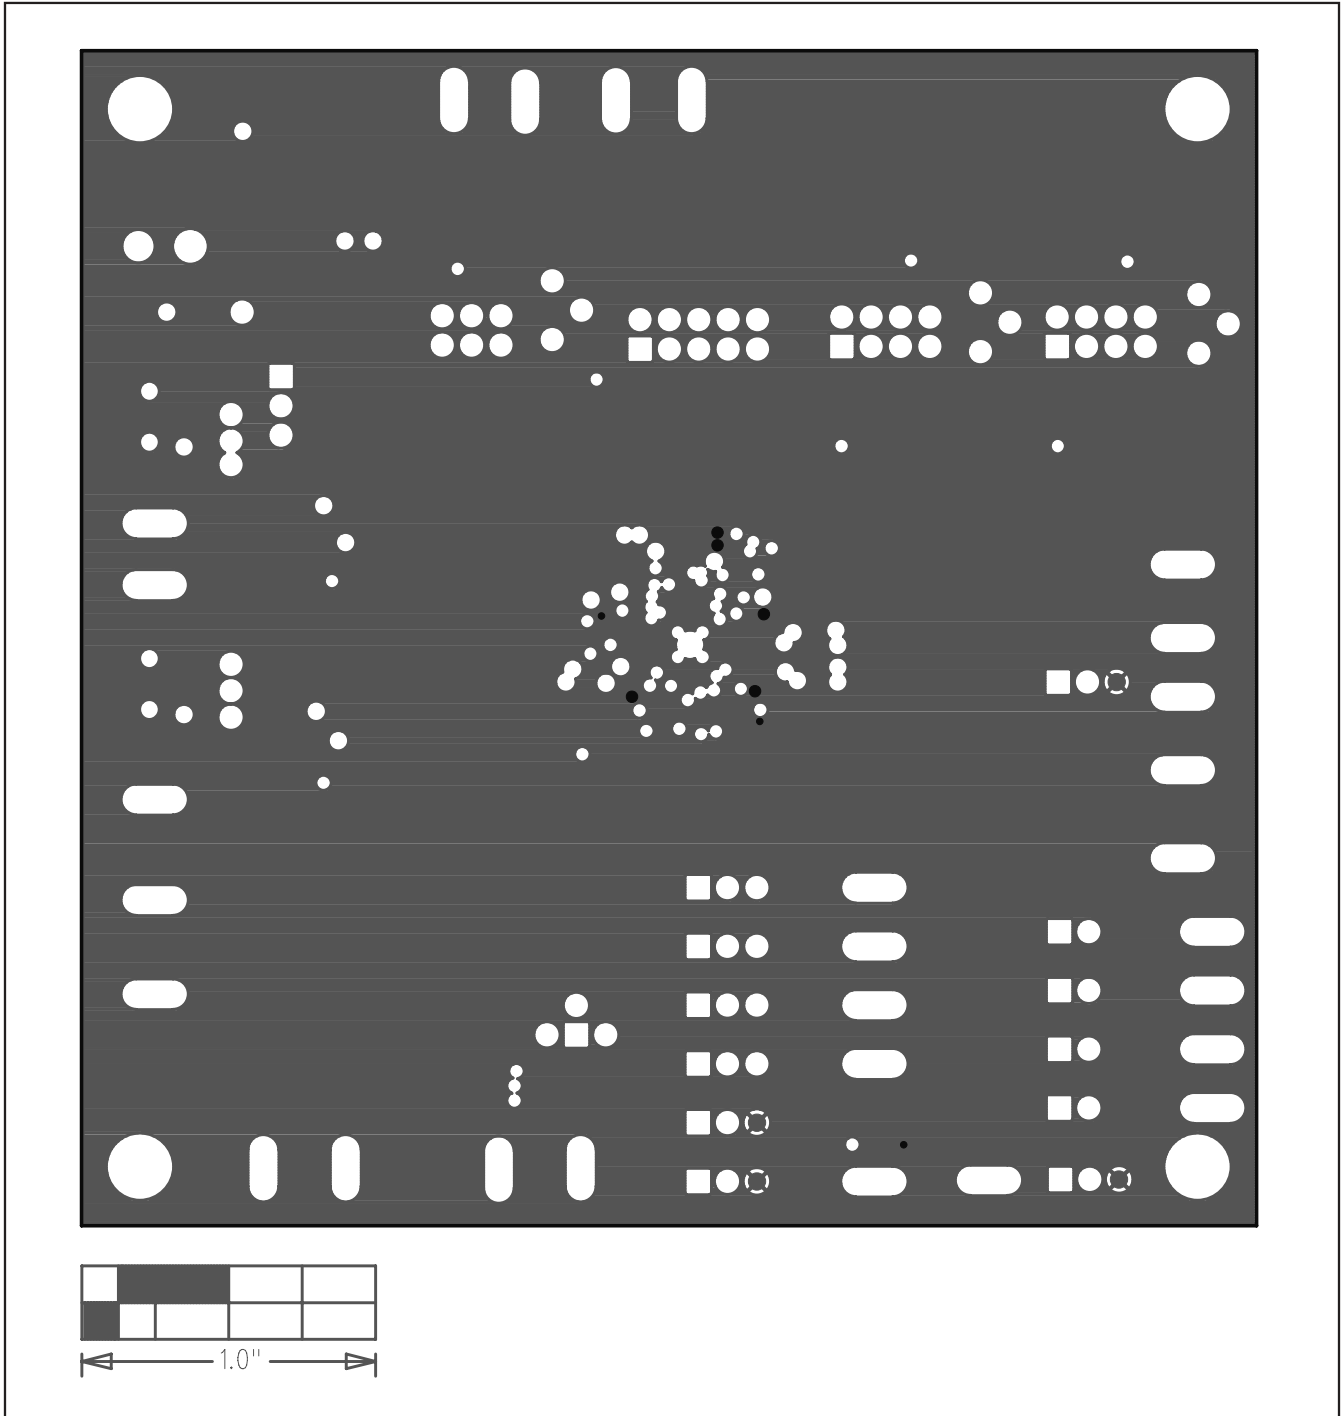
MAX8671 EV Kit PCB Layout—SYS Layer 3
